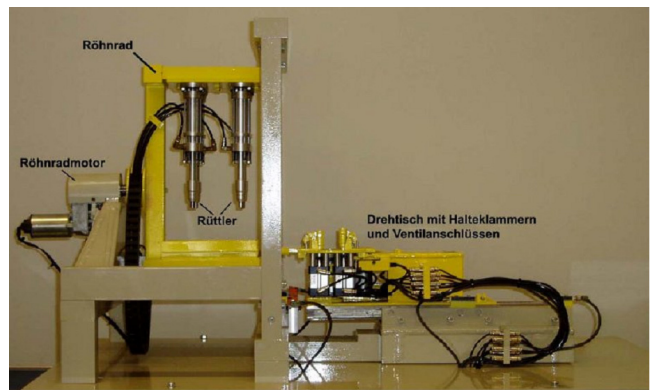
Mechanical model 1:16 of a decoring machine of the company Frölich & Klüpfel Compressed Air Engineering GmbH
